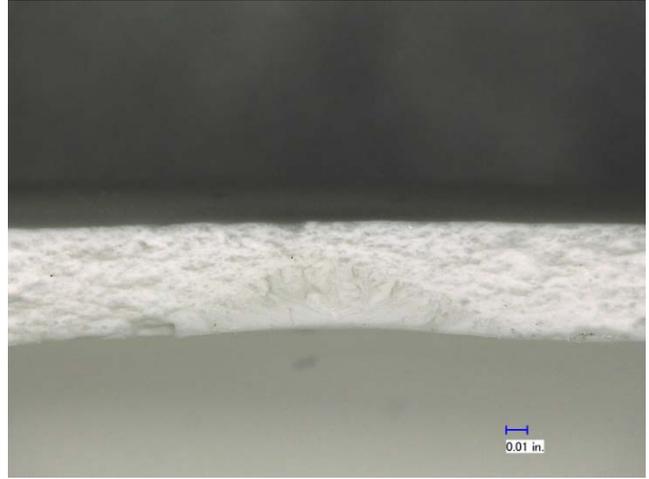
Photomicrograph showing an apparent crack origin on the PVC fracture surface.
